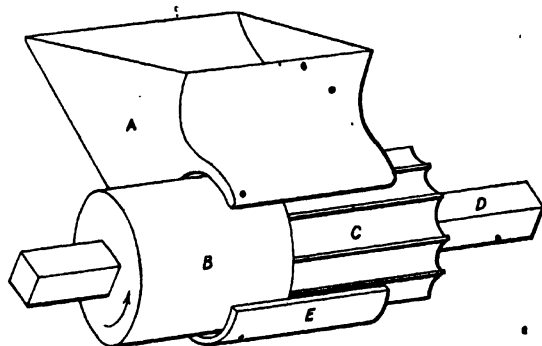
REPRESENTING CHIEF PARTS OF EXTERNAL FORCE-FEED UNIT.
